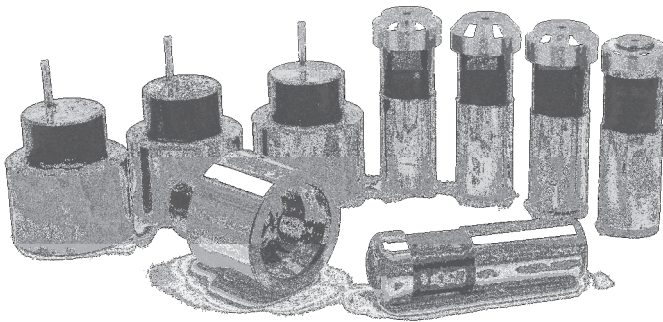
Test valves: seal seats (left) and sealing elements (right)
